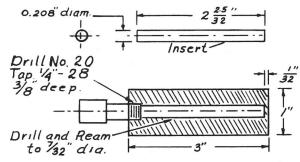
INSERT TYPE SPECIMEN FOR SMALL SAMPLES
